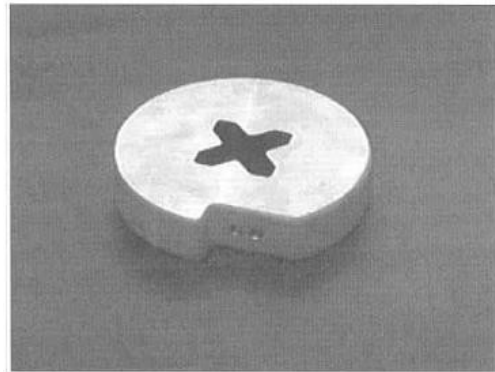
Extrusion die fabricated with the Pro Metal system(Courtesy of Extrude Hone Corp.).
